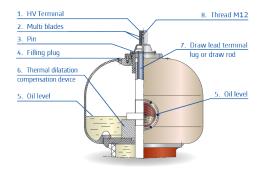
H7 head type (draw lead or draw rod 765 to 1050 kV)
